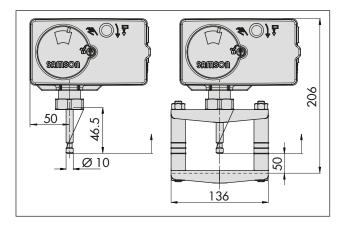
Dimensions in $mm \cdot Form$ -fit attachment
